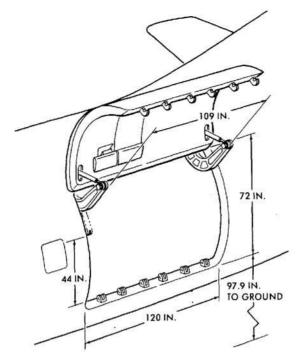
CARGODOOR DIMENSIONS, C-131E AIRCRAFT
